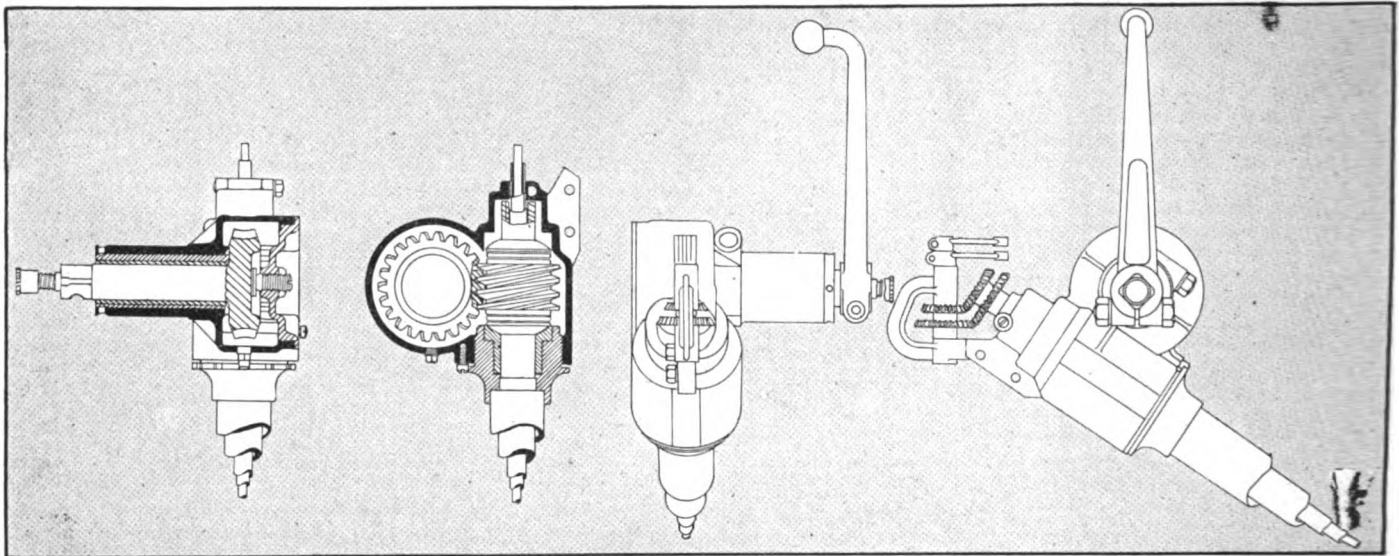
Mechanical details of the new steering gear made by the Warner Manufacturing Company for heavy touring cars and light commercial vehicles
